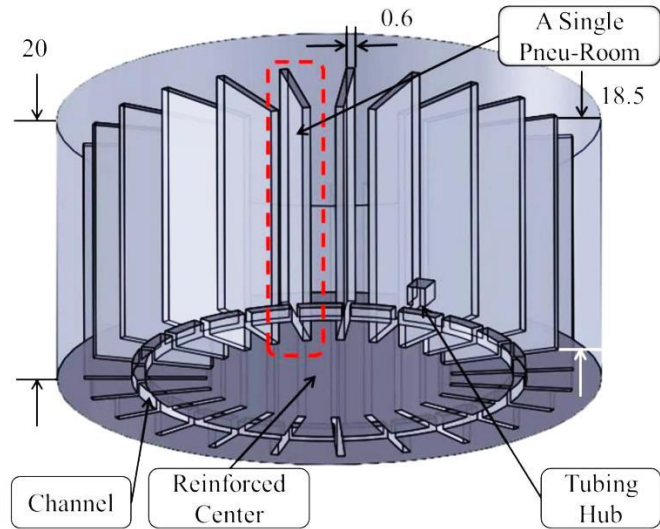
3D Upper Part of Second Version of Capture Mechanism
